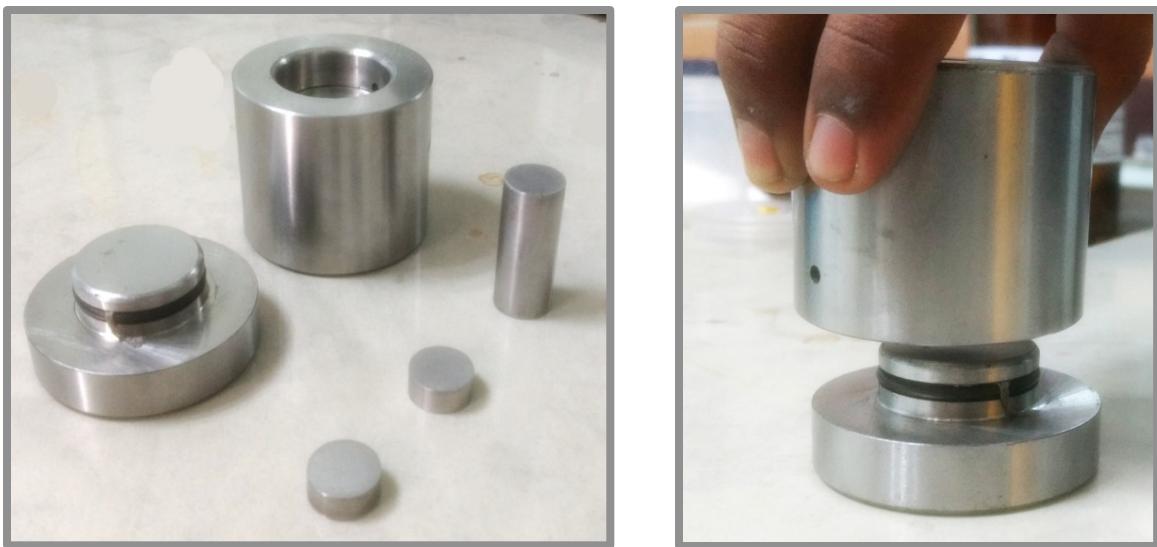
(a) Die, punch and support and (b) die-punch assembly
